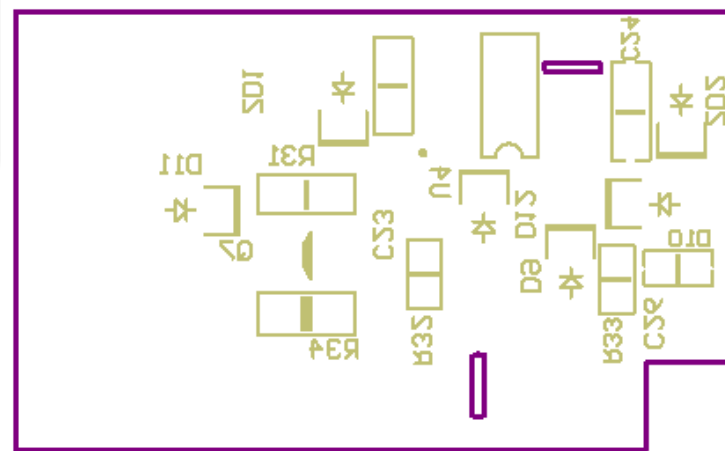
Evaluation Board Layout (Daughter Card), Bottom Overlay
